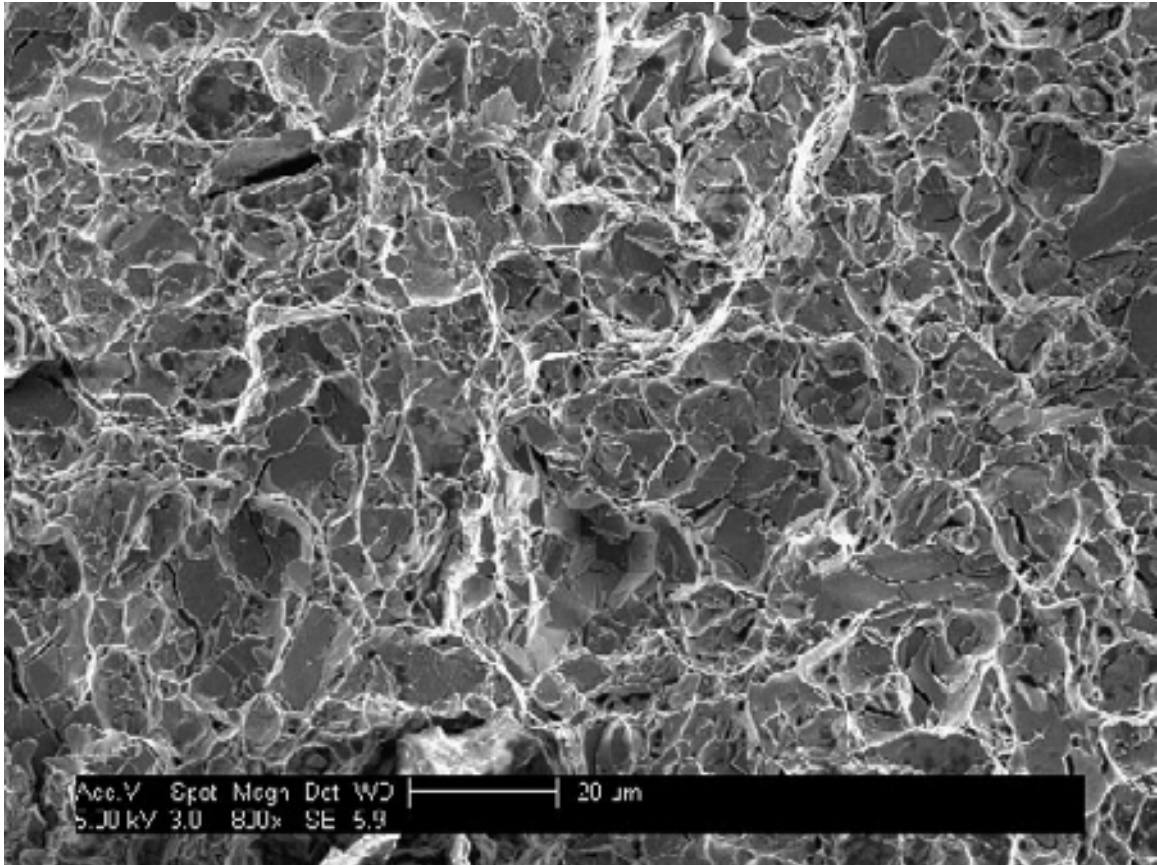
Fracture surface of extruded Ti-6Al-4V-2.9B composite showing brittle fracture across the width of TiB whiskers aligned in the extrusion direction and ductile fracture of the Ti-6Al-4V matrix.
